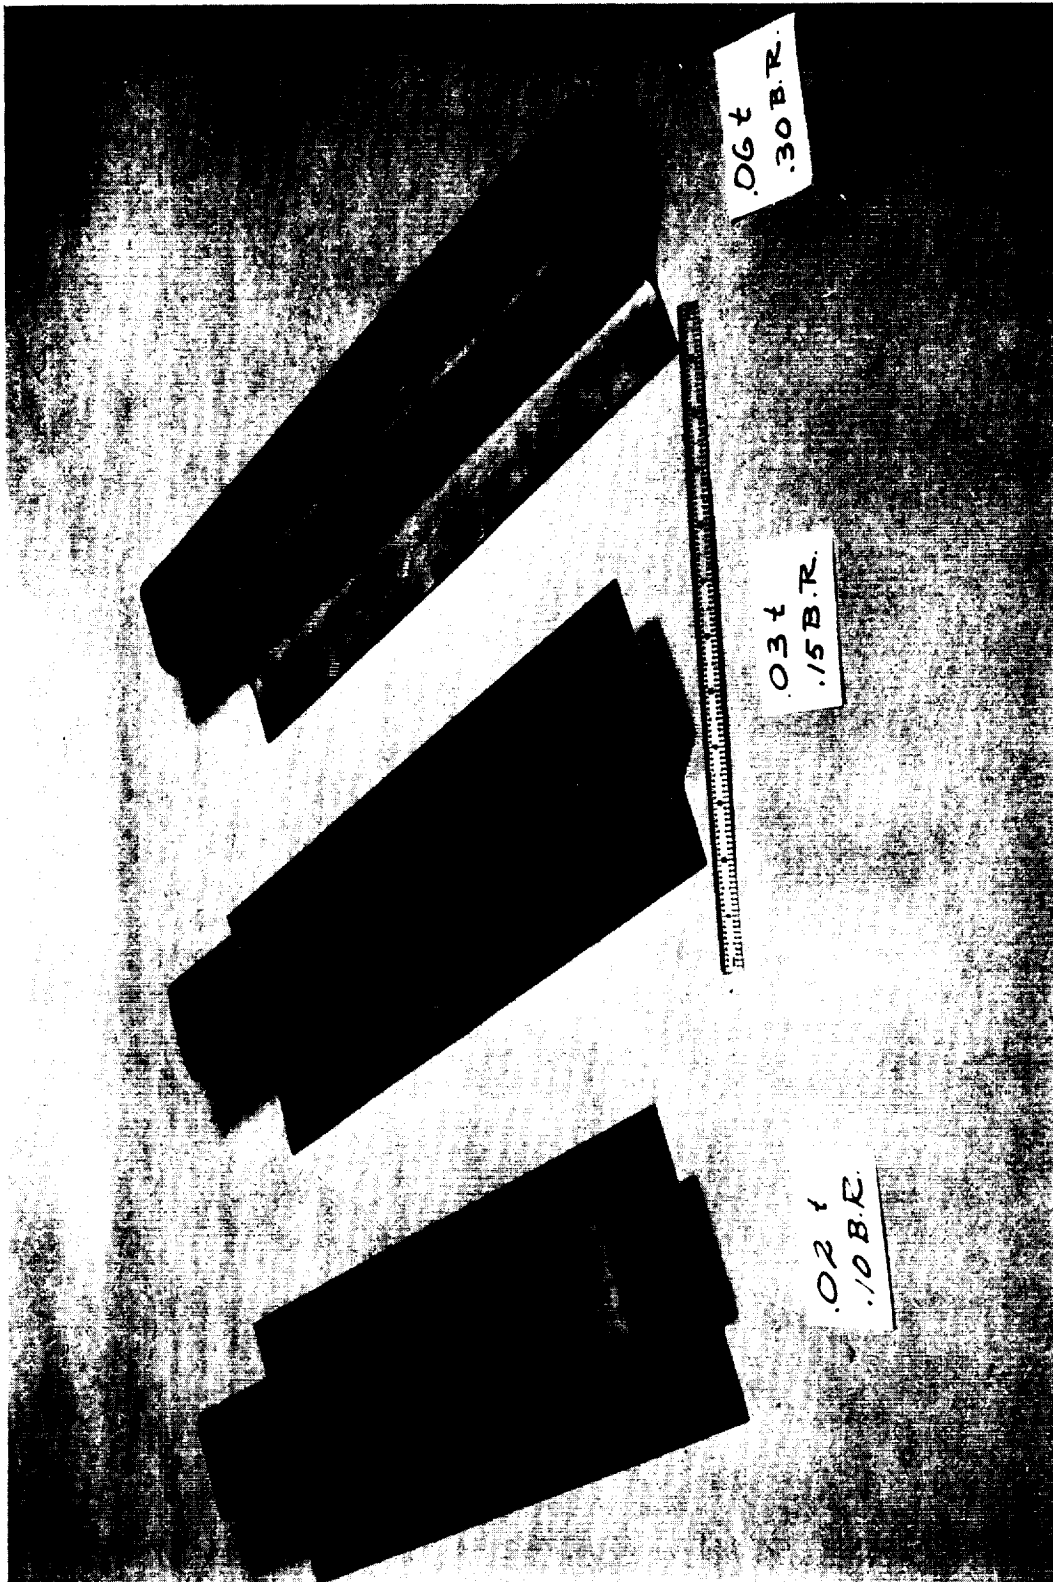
REPRESENTATIVE HAT SECTIONS FORMED ON THE UNIVERSAL FORMING DIE.
